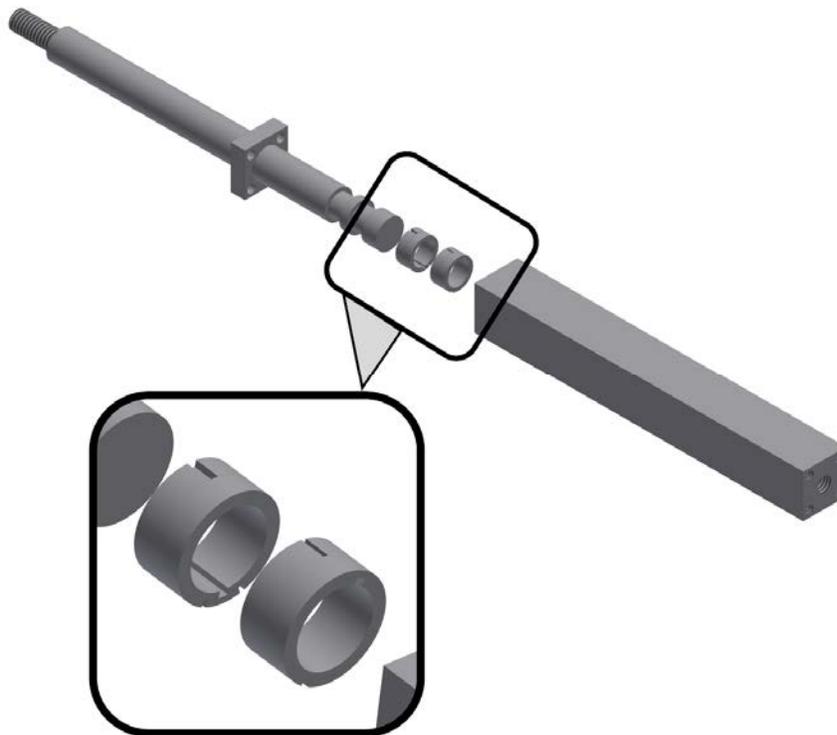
Piston cylinder assembly with zoomed view of piston ring interaction.
